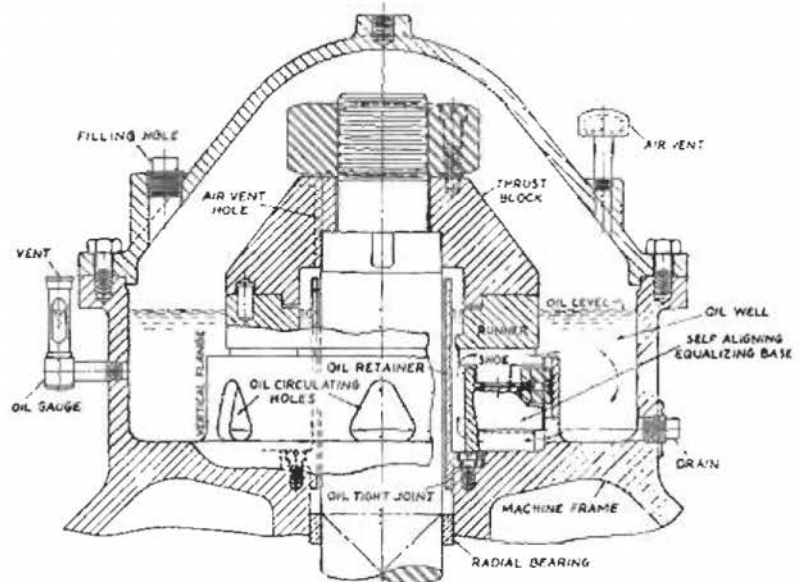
Simple mounting for vertical thrust bearing. Arrows show direction of oil flow.
